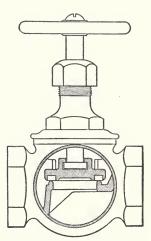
Globe Valve with Detachable Cap and Removable Interior Disc of Comparatively Soft Material to Insure Tightness.
